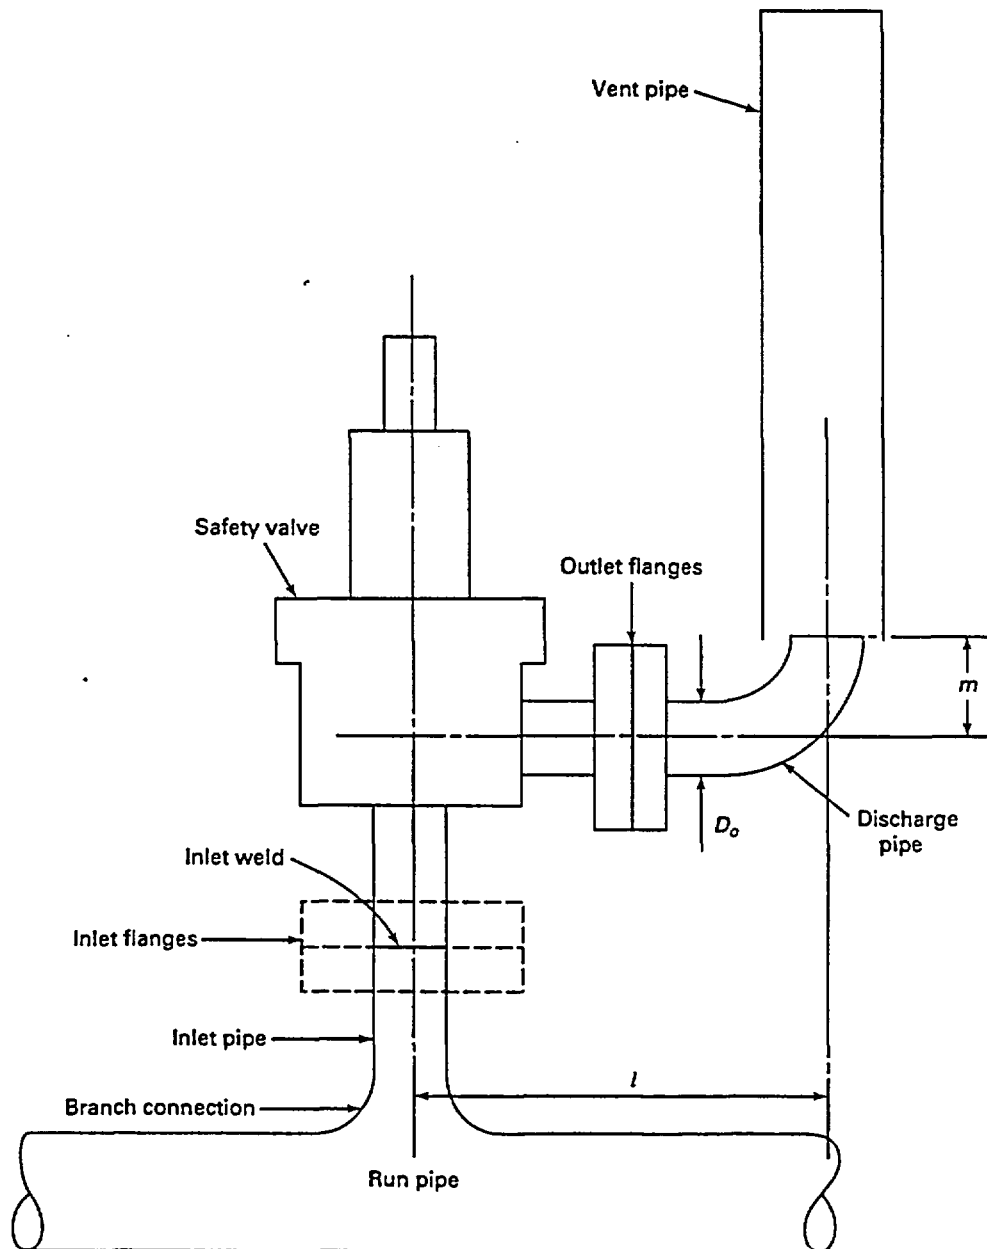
(A) SAFETY VALVE INSTALLATION (OPEN DISCHARGE SYSTEM)
